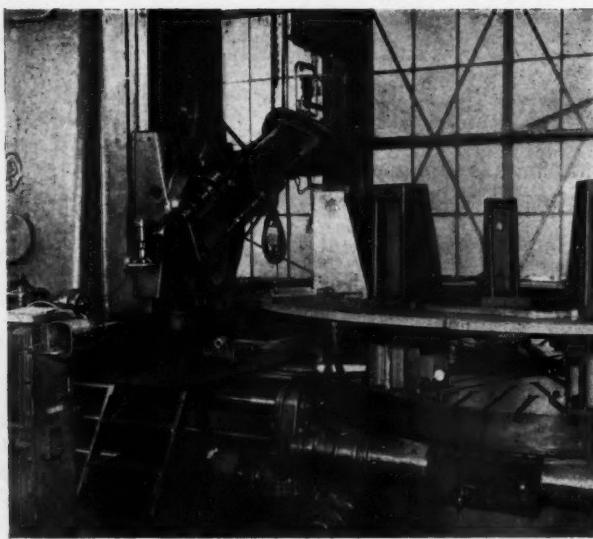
Close-up view of a large Power Plant gear-hobbing machine which will cut gears up to 15 ft. diameter by 7 ft. 6 in. face width. Another column and hobbing head is provided opposite to that here shown, and with this arrangement upper and lower portions of double-helical gears can be cut simultaneously
